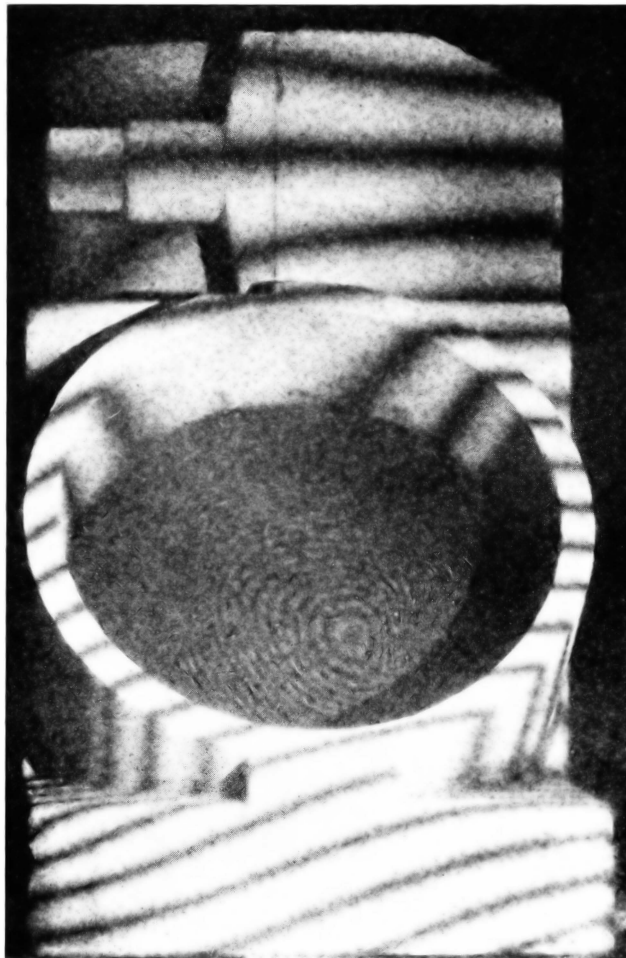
Mount for pick-up tubes and colour-separation prism in a Philips television camera. The pick-up tubes are clamped in the cylindrical openings directed obliquely forwards, upwards and backwards in the photograph. The casting is shown with its flange on the table. This flange is often subject to local heating from the powerful lights in the studio.
